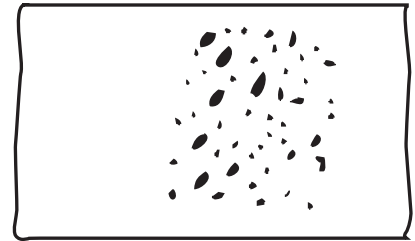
CHARTS FOR t OVER $\frac{3}{4}$ in. to 2 in. (19 mm to 50 mm), INCLUSIVE
